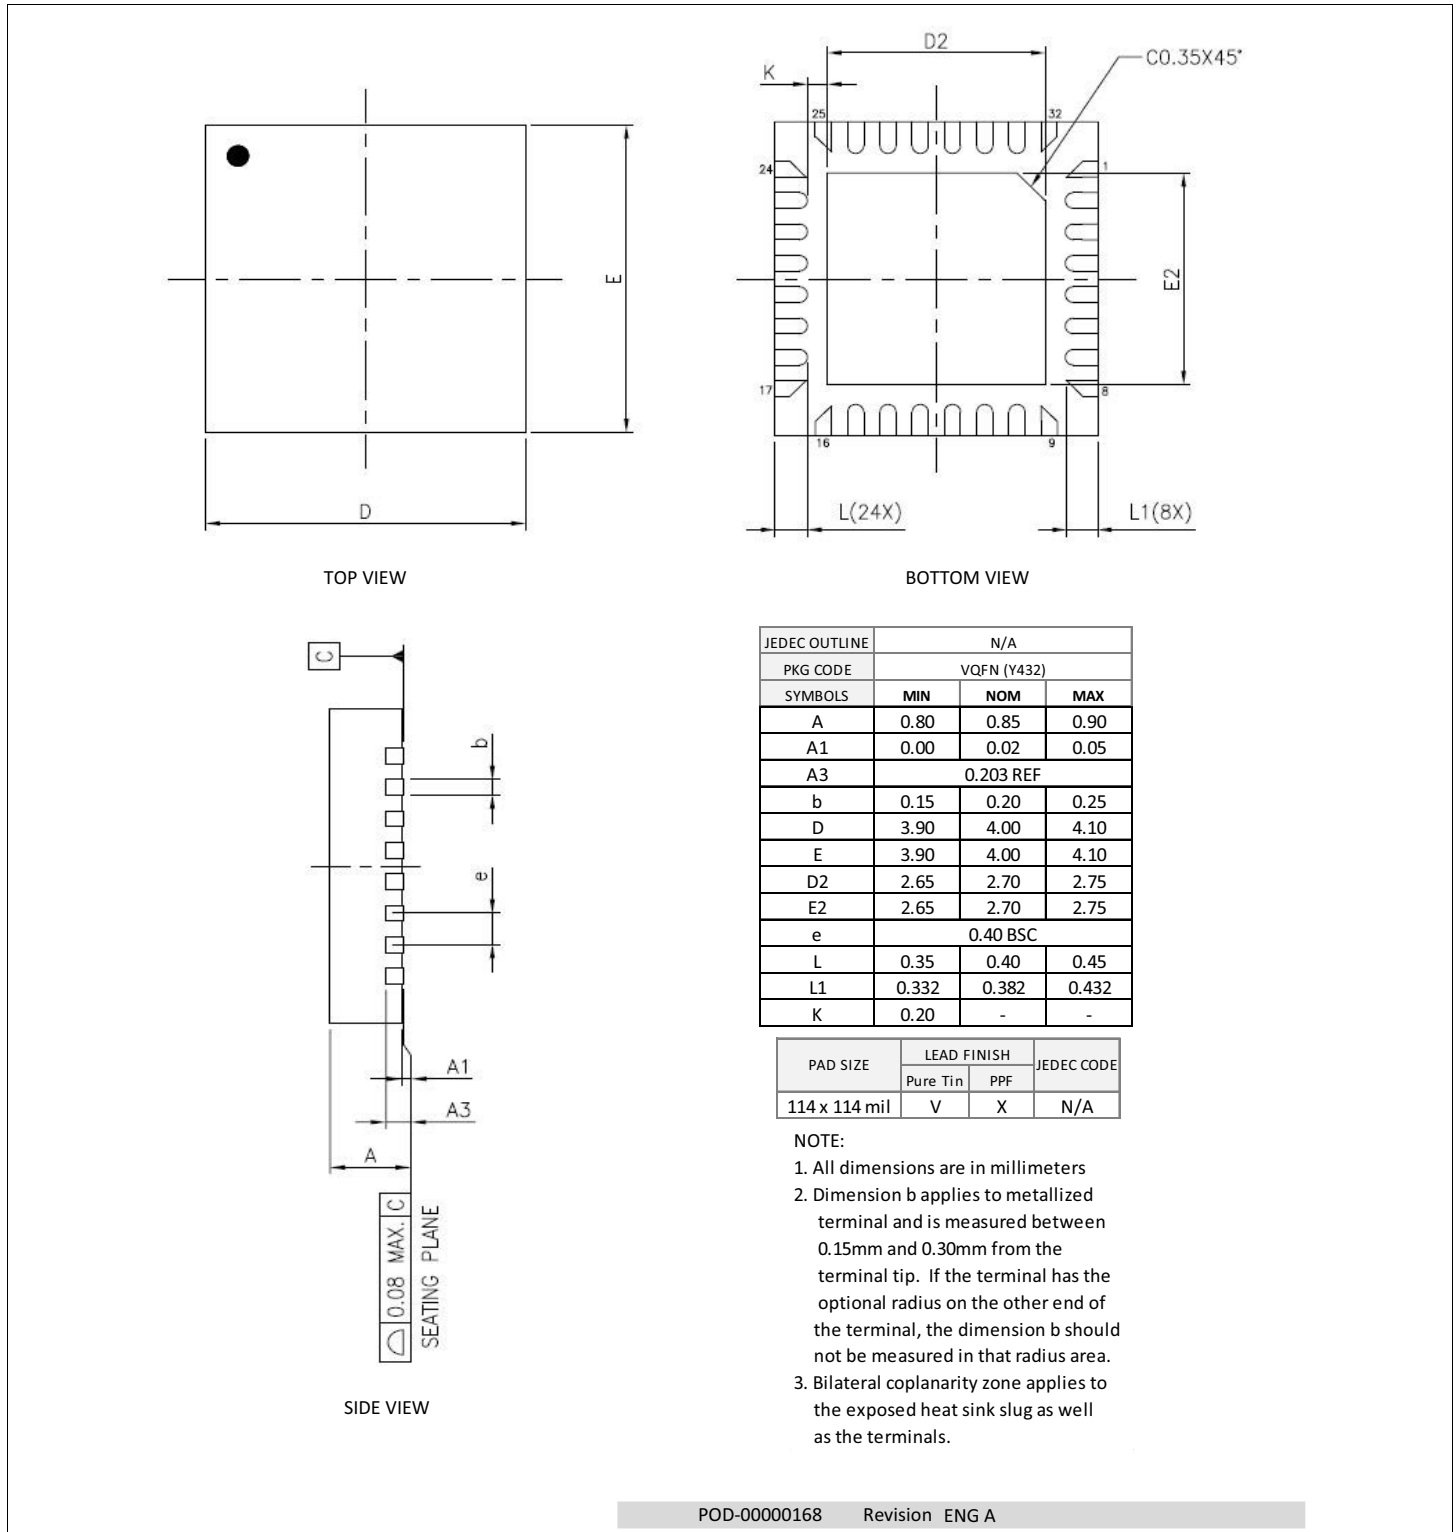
Packaging Dimensions—4mm × 4mm QFN
